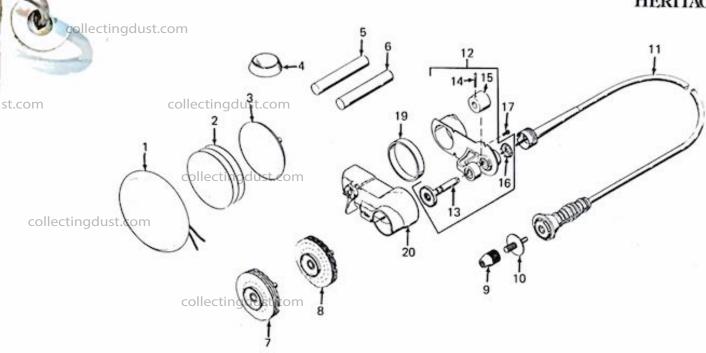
Kirby HERITAGE Handi-Butler group, exploded view
